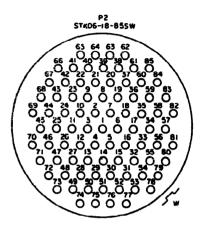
Cable Assembly, Special Purpose, Electrical CX-1272l/AYM-8, wiring diagram.
